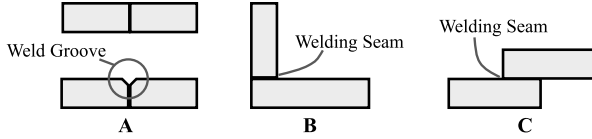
Three weld joint types used in the experiments. (A) Butt joint (B) Corner joint (C) Lap joint.
